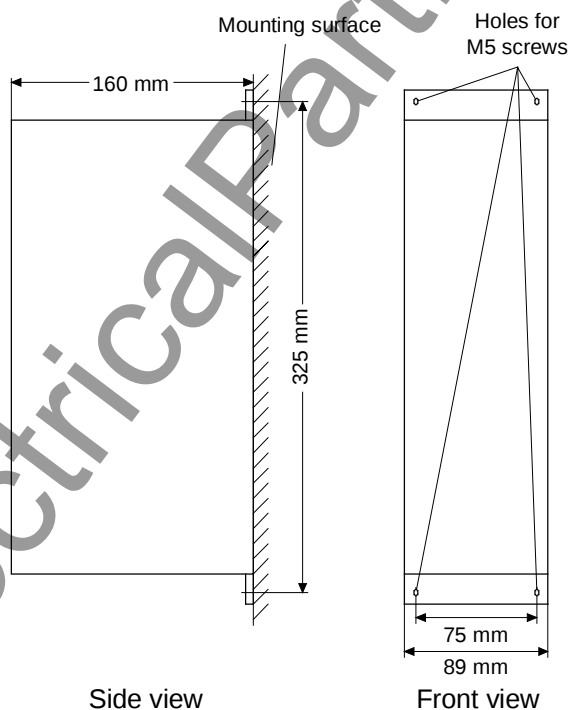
Dimension drawing of the 12 A / 18 A EMC filter
